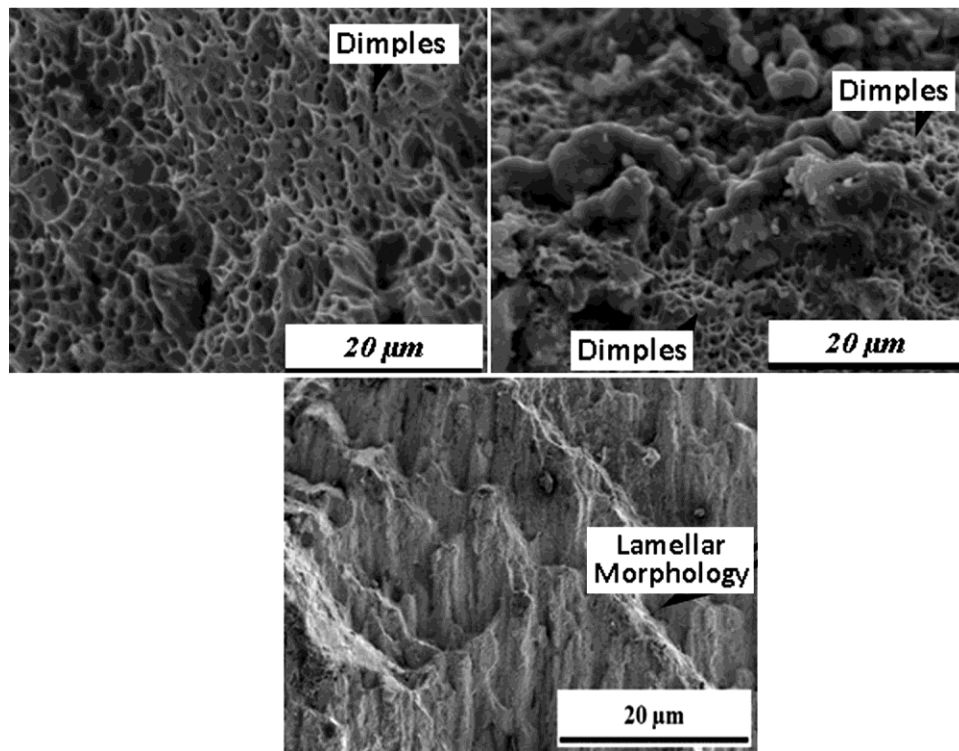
Fracture surface morphologies of (a) laser remelted MIG welding (400 W), (b) laser remelted MIG welding (600 W) and (c) MIG welding.
